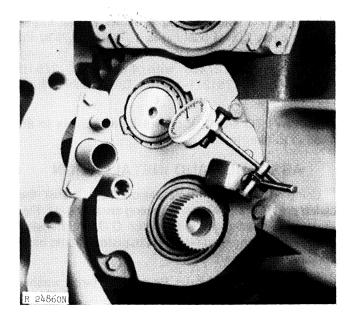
Checking Clutch Oil Pump Idler Gear End Play
